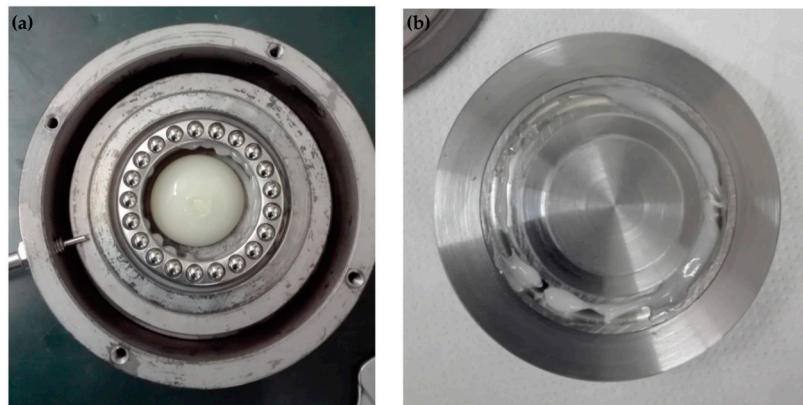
Grease spread on (a) the rolling bearing house, lower raceway, and cage, and (b) on the upper raceway shaft.
